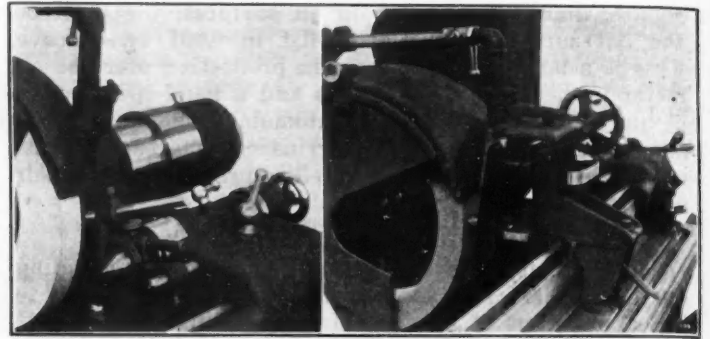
AT THE LEFT A RADIAL WHEEL TRUING ATTACHMENT AND AT THE RIGHT A WHEEL FORMING DEVICE
